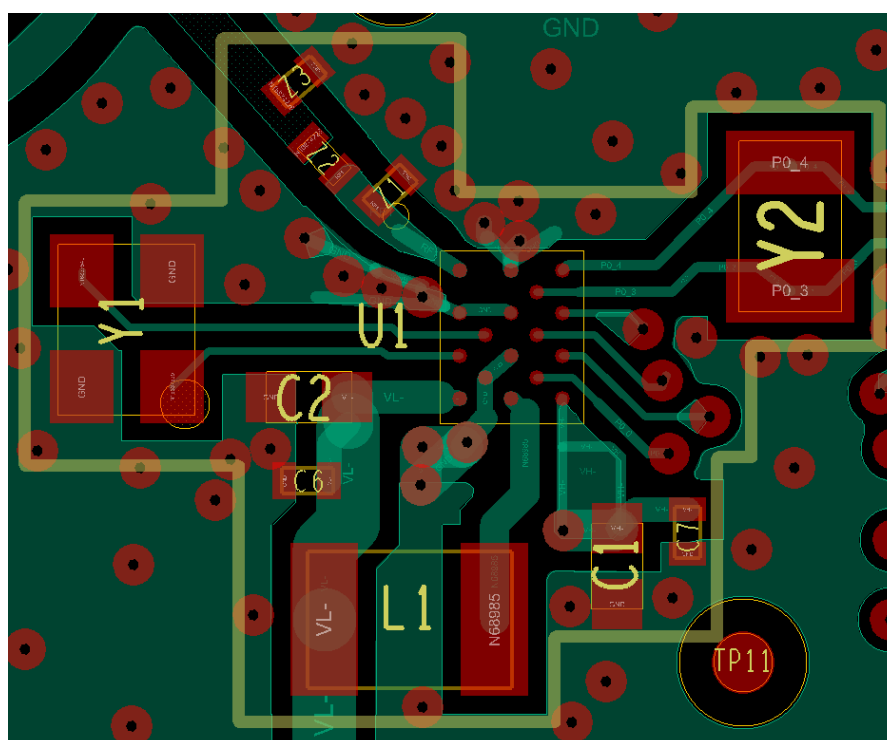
WLCSP17 - PCB Placement and Routing – Top Layer
